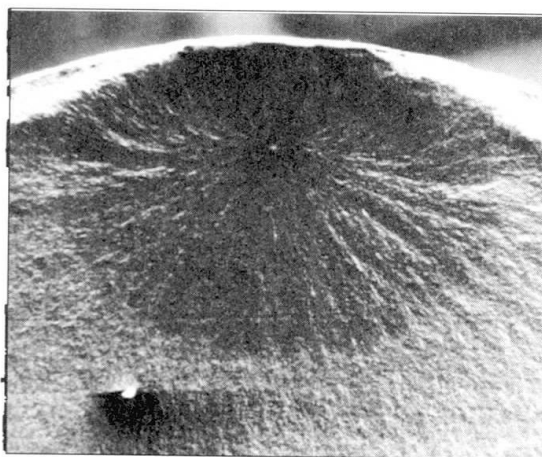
Fatigue Fracture Surface of an OT Wire
